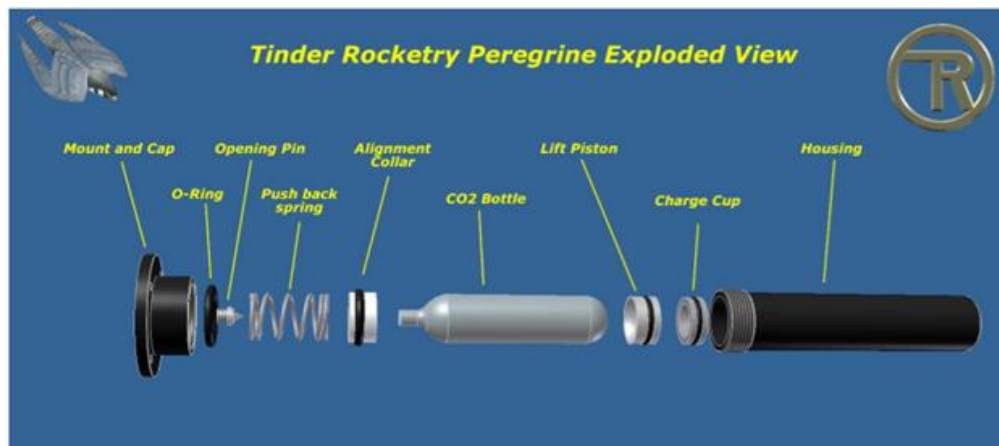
Tinder Rocketry Peregrine Exploded View [41] © Tinder Rocketry
